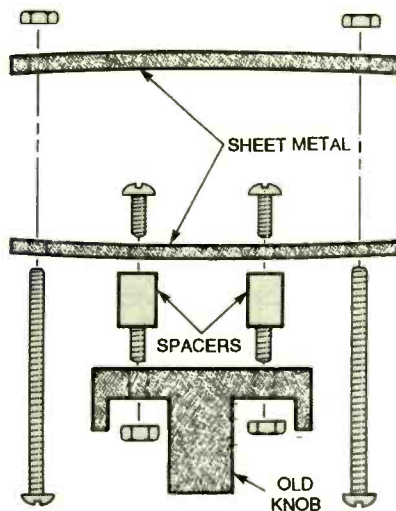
The paint-shaker module can easily be made by mangling a perfectly good printer-platen knob.
